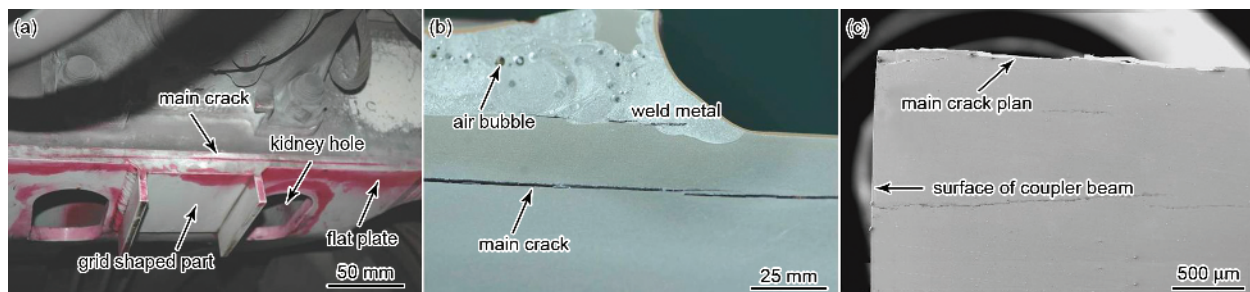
Morphologies of (a) crack appearance of the coupler beam, (b) macro-appearance of the crack, (c) micro-appearance of the cracks
